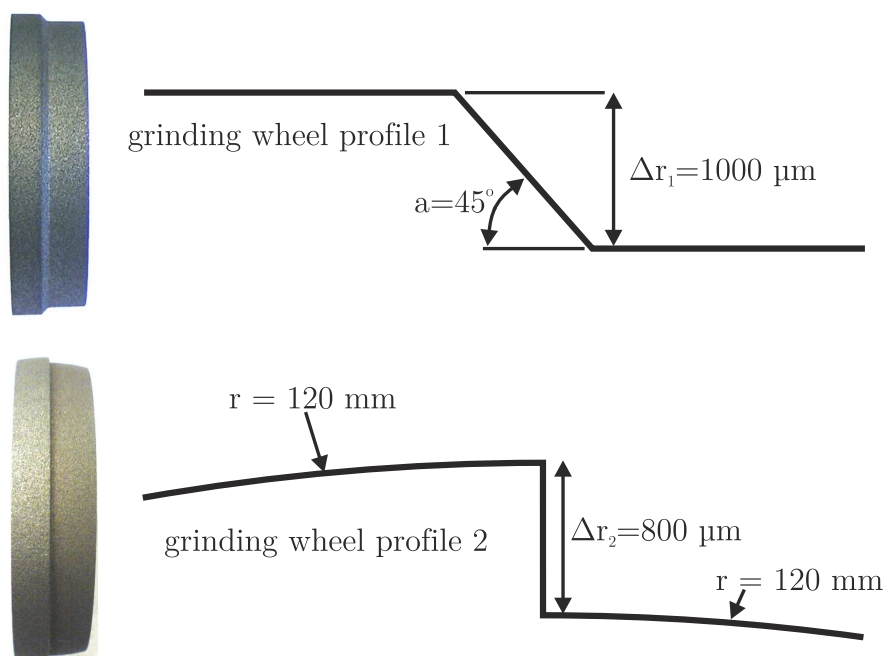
Grinding wheel profiles after WEDD with the new wire guide
